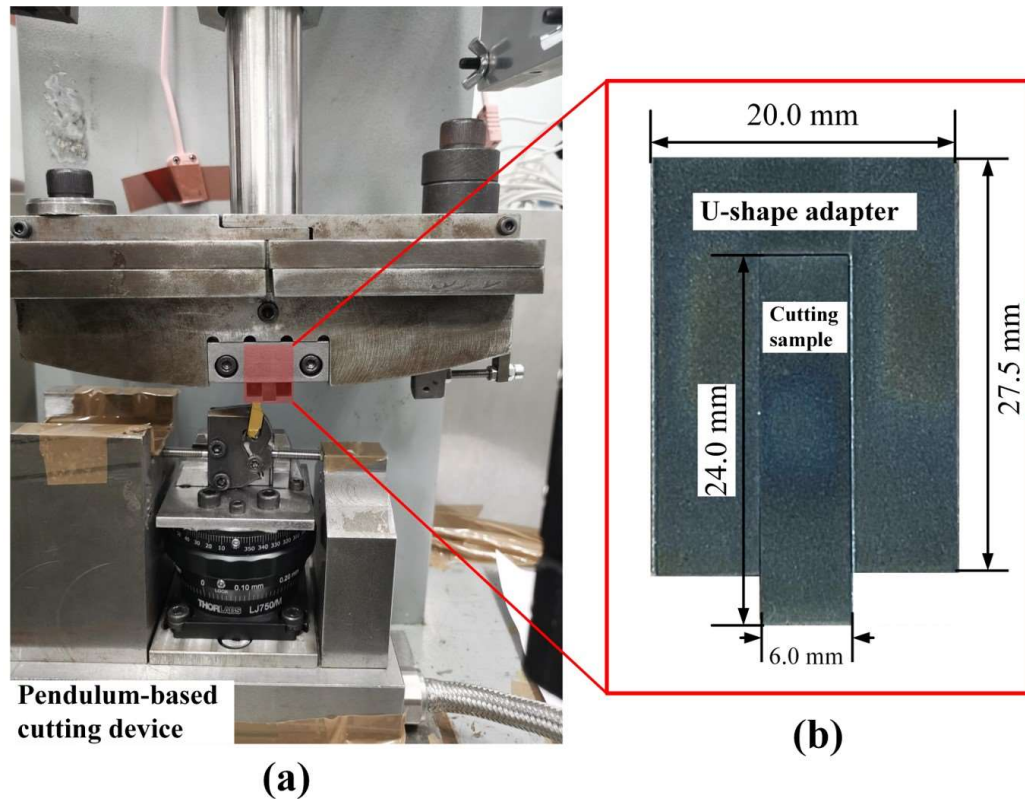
Orthogonal cutting machine and adapter for sample fixing. (a) Pendulum-based orthogonal cutting machine; (b) Dimensions of U-shape adapter and sample.
